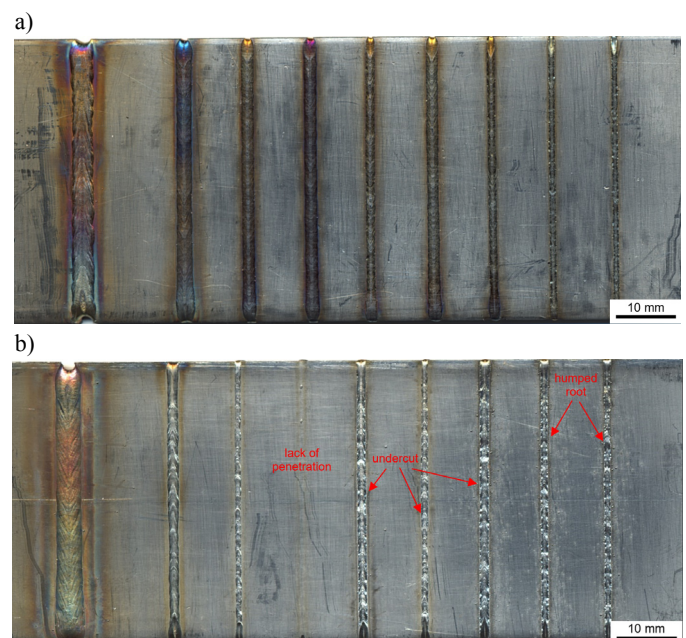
A view of the bead-on-plate welds produced by disk laser melting of 2.0 mm sheet of AISI 304 stainless steel (bead No. 1 to 9 from left, Table 3); a) weld face; b) root surface
